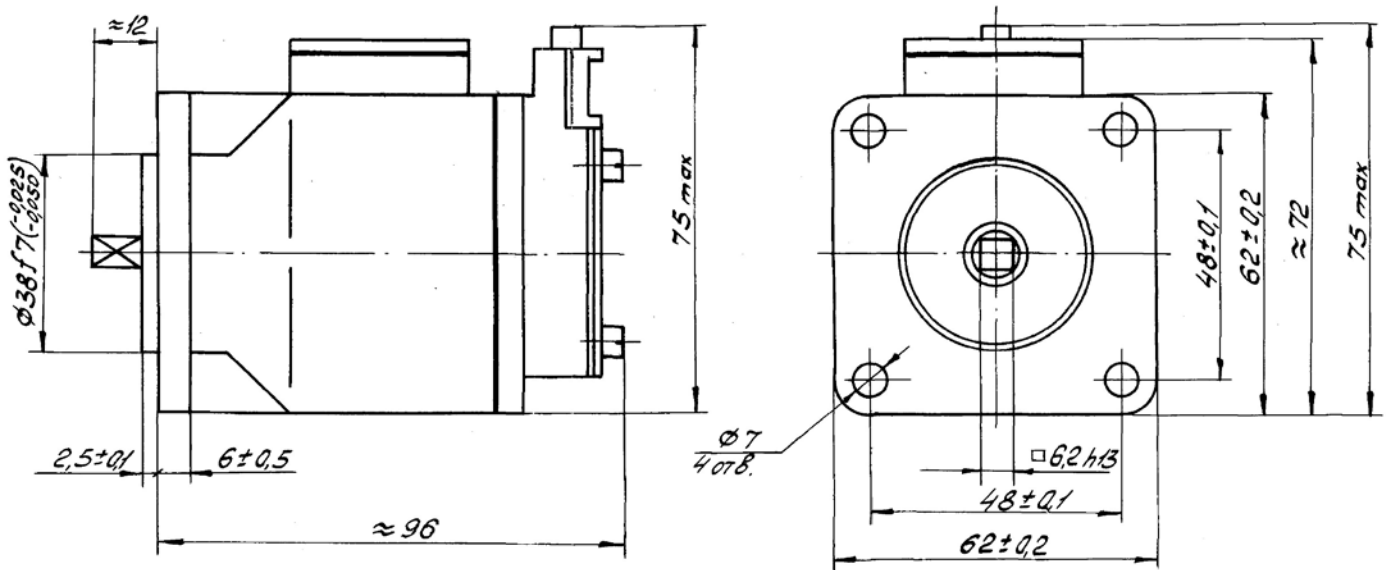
Overall and attachment dimensions of ППЭ-Д primary transducer
